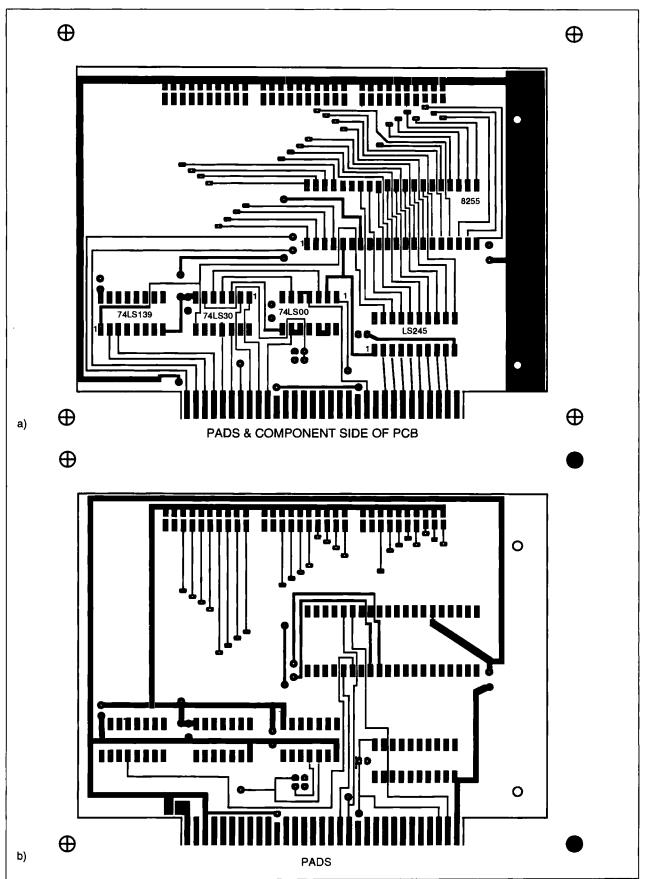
1:1 PCB layout, component side; b) 1:1 PCB layout, solder side.
